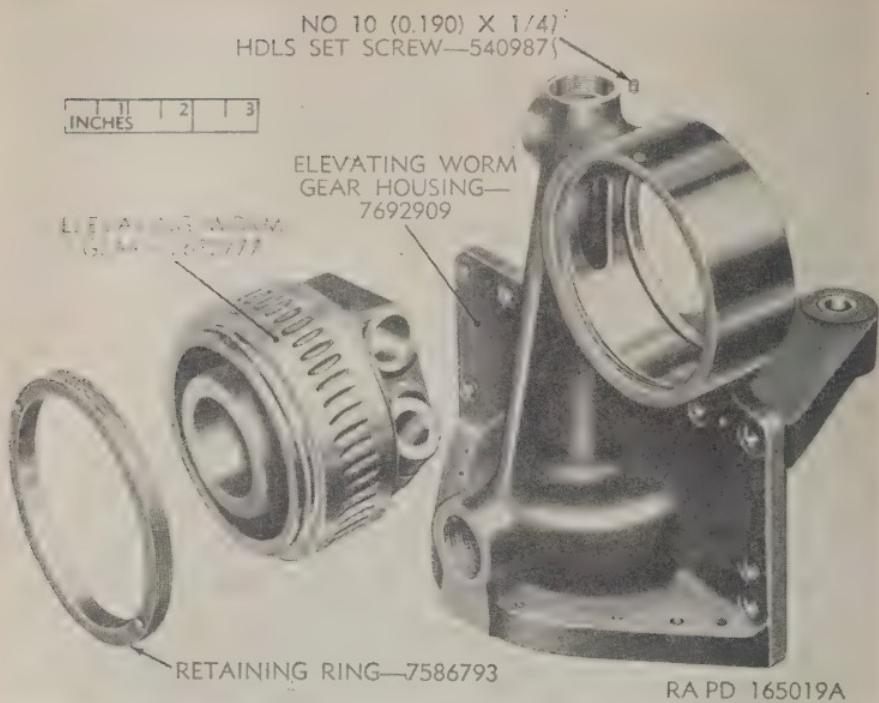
Telescope mount M32—removal of the elevating worm gear—exploded view.
